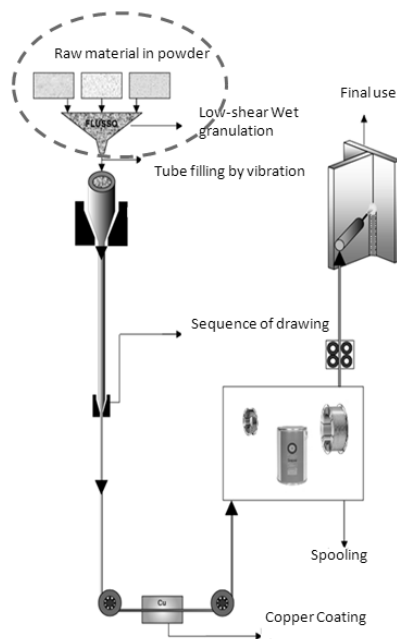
Schematic of manufacturing of welding rods process
